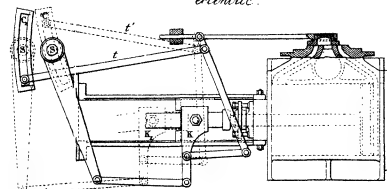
Mediterranean engine similar to 1130 forward gear.
